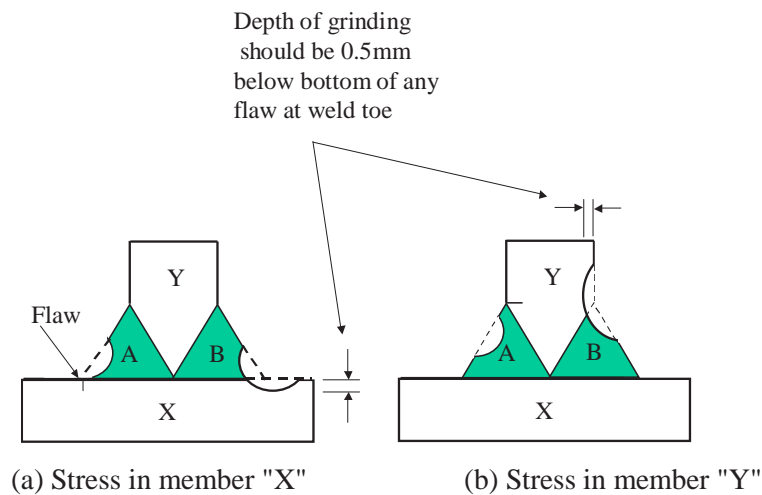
(a and b): Toe grinding to improve fatigue [24]
